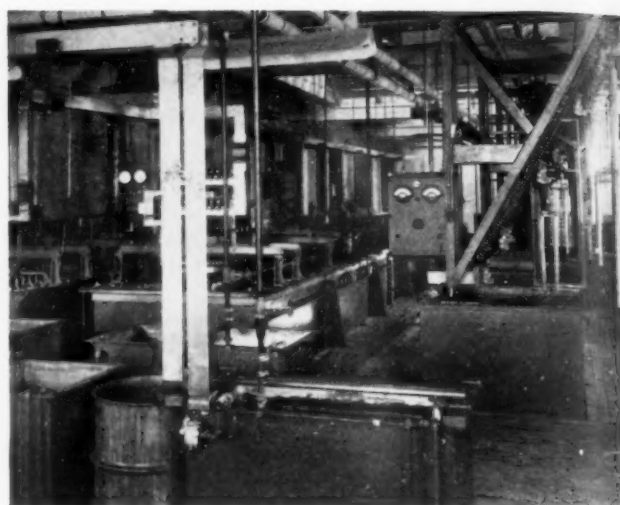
Loading end of angle type conveyor. The conveyor is loaded on the downward travel of the chain.
